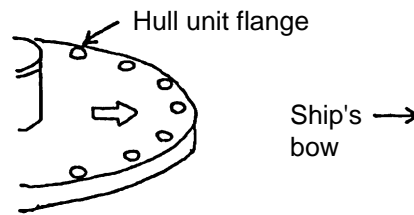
Coating the tank flange with sealant (supplied)
